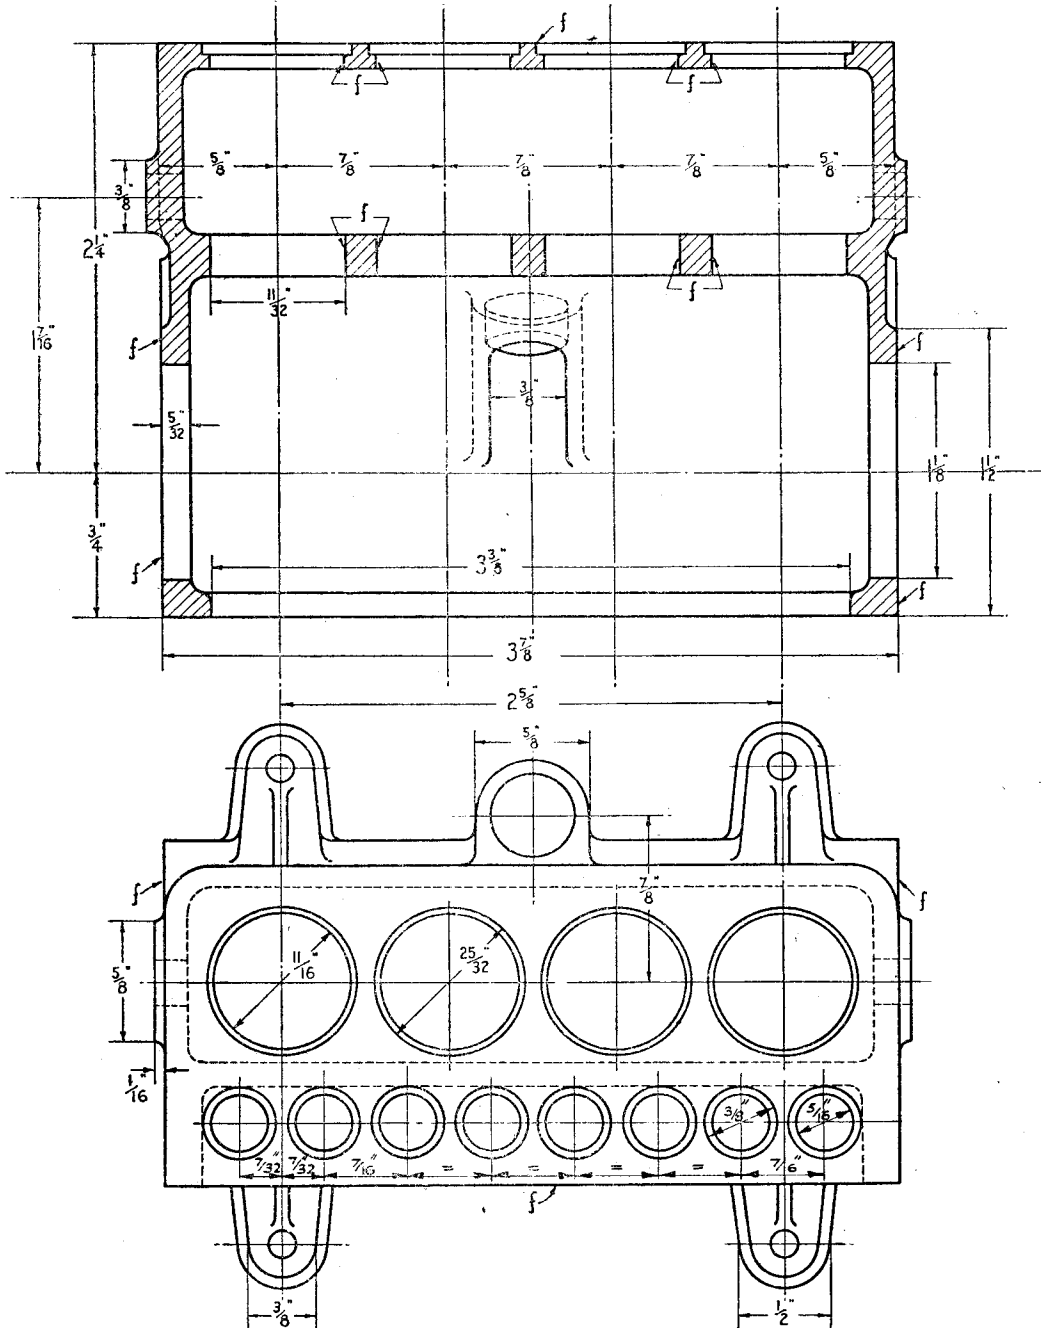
Sectional side elevation and plan of cylinder and crankcase block
